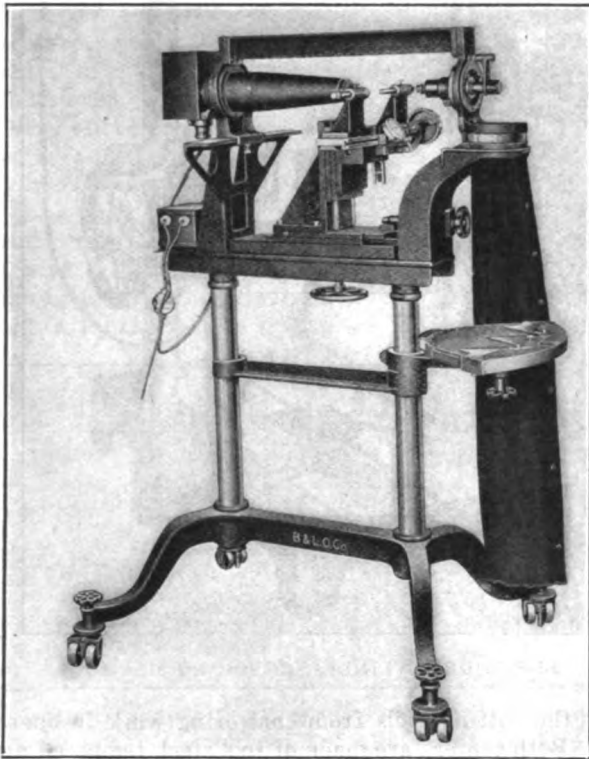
BAUSCH & LOMB CONTOUR MEASURING PROJECTOR WITH ADJUSTABLE THREAD CHART AND LEAD MEASURING ATTACHMENT
